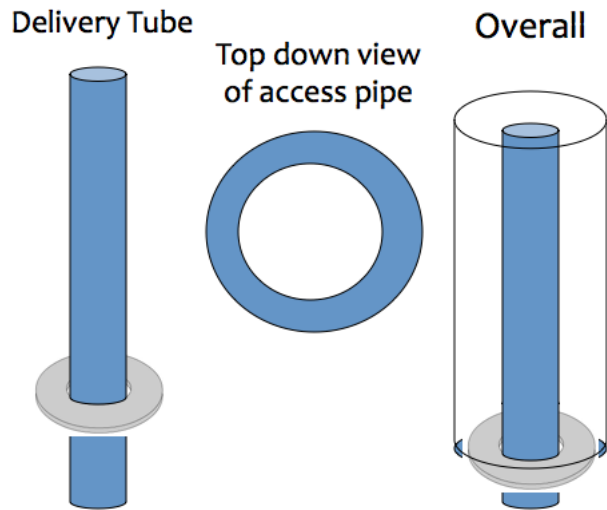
Washer Fabrication Idea for Injection Point Deliver Tube
